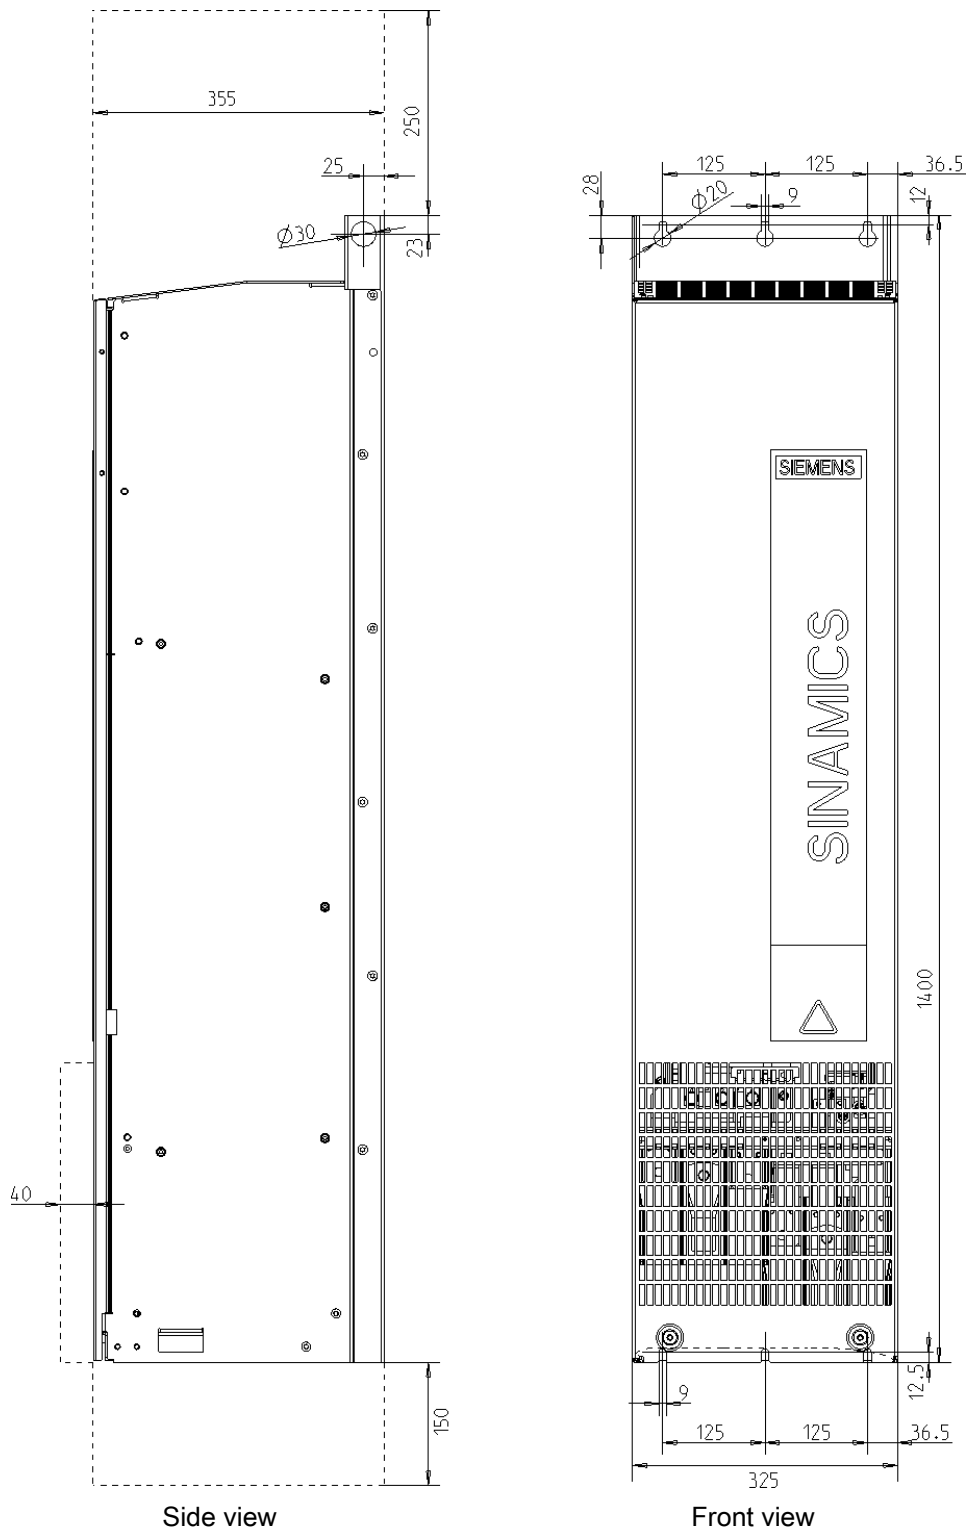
Dimension drawing of the Active Interface Module (type FI)
